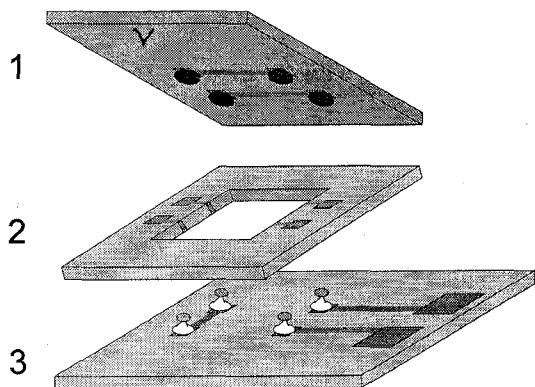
Assembly of chips in this investigation: 1: glass chip with under bump metallization and solder bumps, 2: silicon intermediate chip with multiple frontside to backside interconnections and top surface metallization, 3: silicon chip with aluminum metallization, gold stud bumps and conductive adhesives. The interconnection scheme in this figure was designed for electrical characterization.
